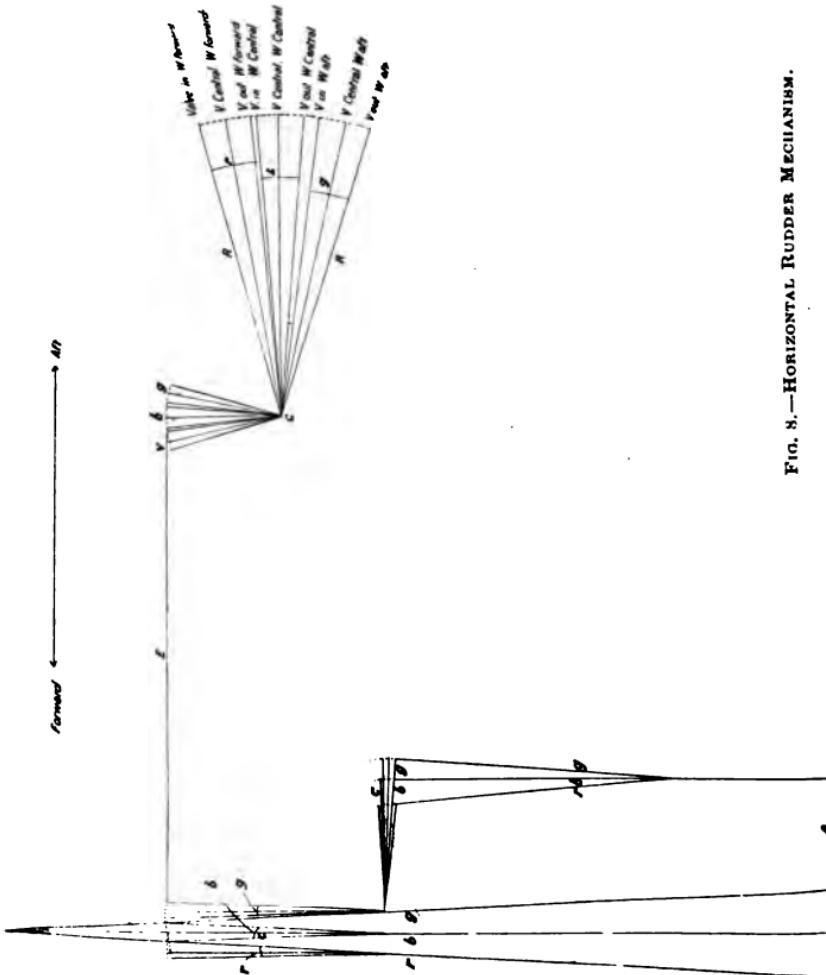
HORIZONTAL RUDDER MECHANISM.
